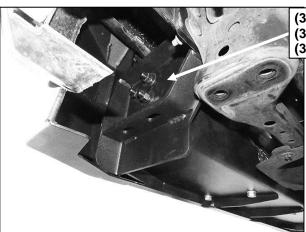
Push Bolt Plate through side of Bumper and Winch Tray
